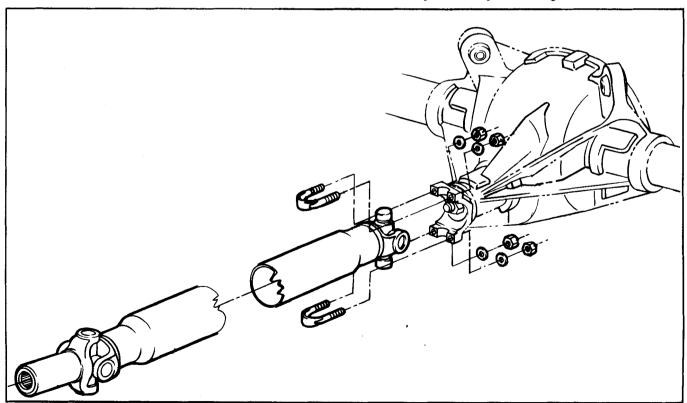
E-6 Propeller Shaft Installation - A and G Series
